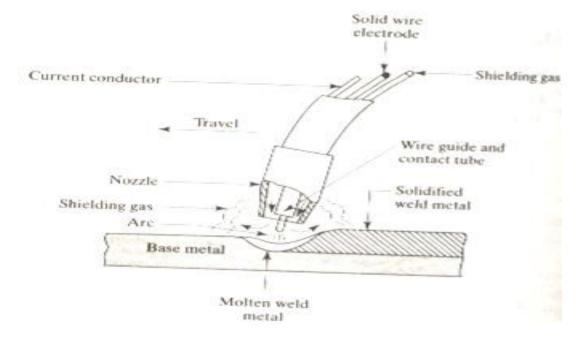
Schematic illustration of the gas metal arc welding process
